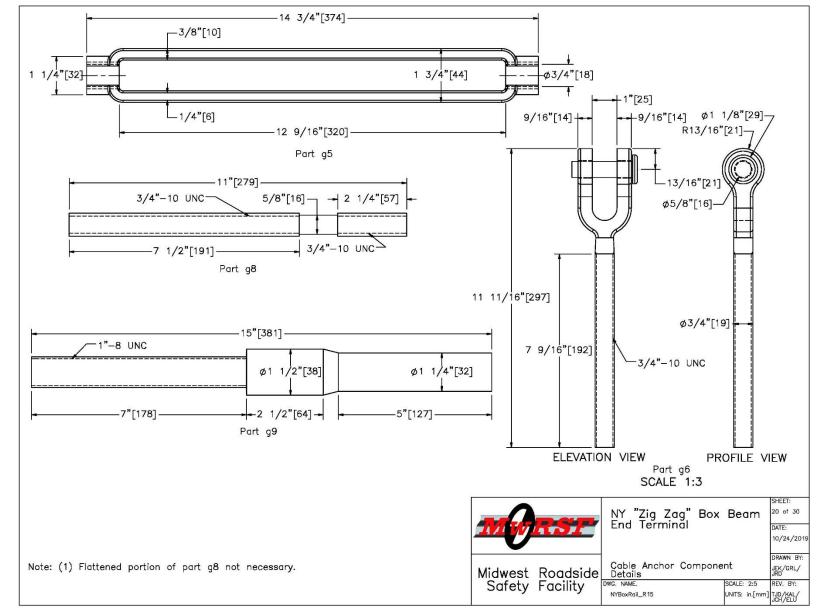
Cable Anchor Component Details, Test No. NYT-1
